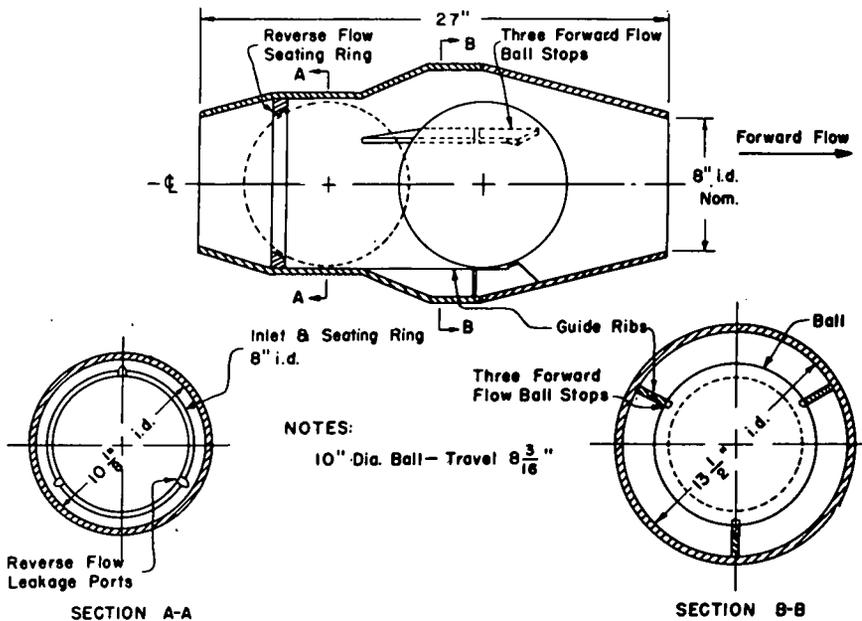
DETAILS OF BALL CHECK VALVE "B".
